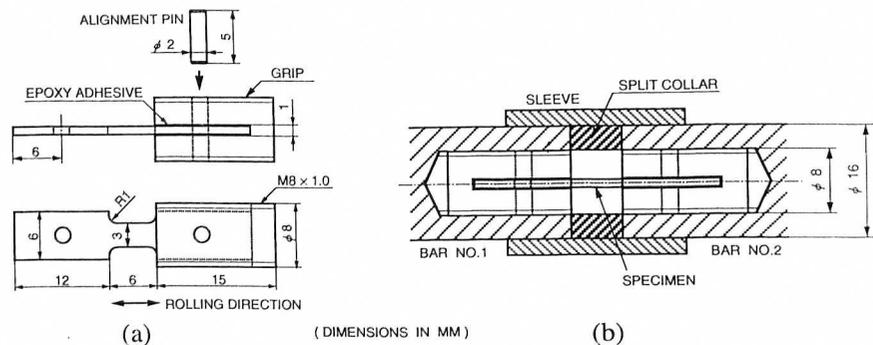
Geometry of sheet tension specimen and its attachment to Hopkinson bars
